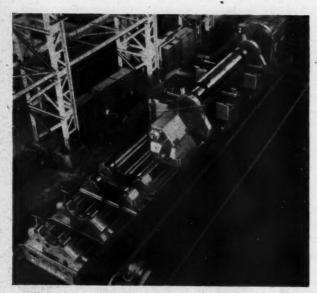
Large lathes are built for roll turning and other purposes. This machine has a centre height of 3 ft. 11 in. over the bed, and will admit a maximum length of 52 ft. 6 in. between centres
